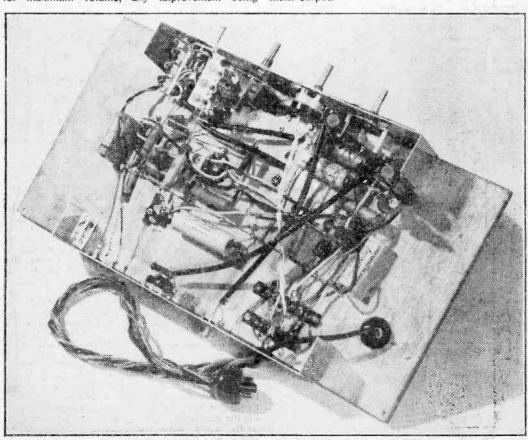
Photograph of underside of tuner unit using baseboard construction.
